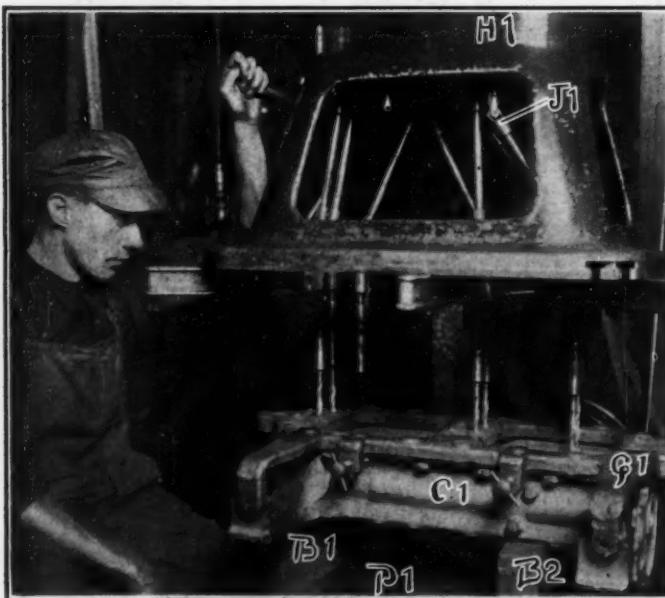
A multiple spindle drill having 16 spindles, some of which are engaged on a Regal crankcase, guided by a jig
